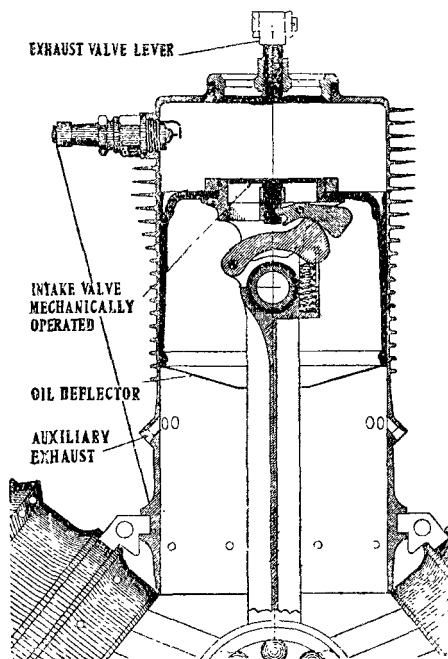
Mechanically operated Inlet Valve on Gyro Motor.
